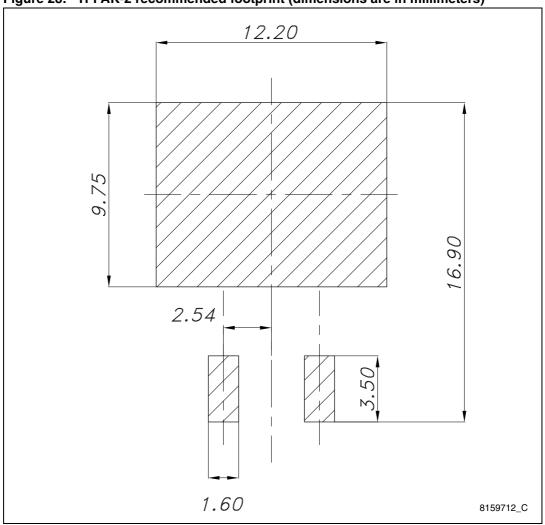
H²PAK-2 recommended footprint (dimensions are in millimeters)
